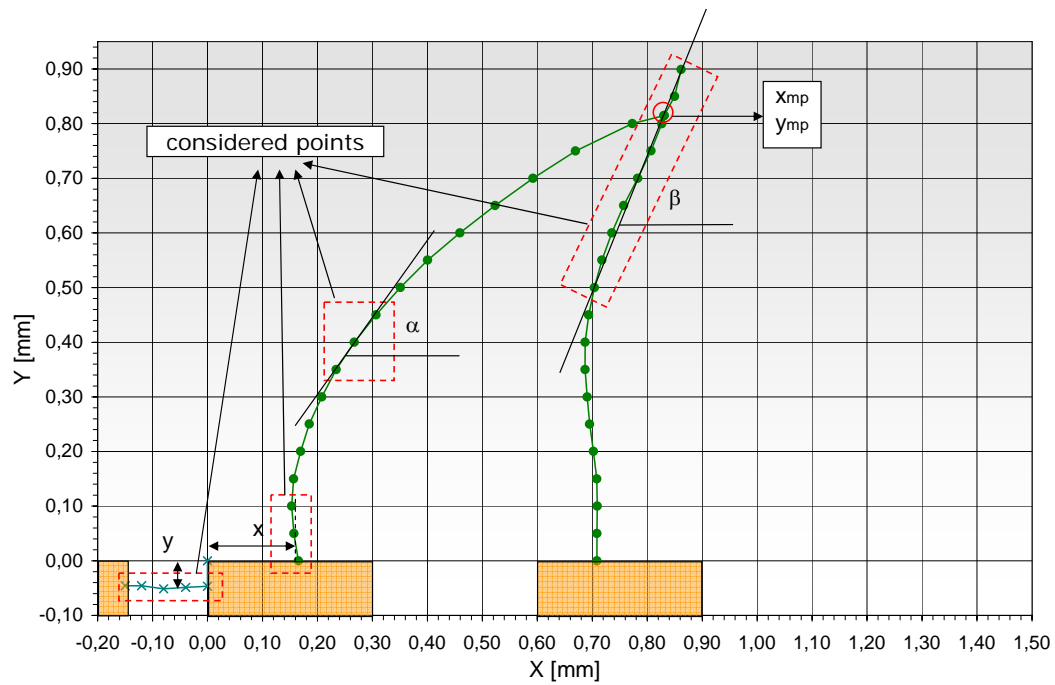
Outputs definition for the weld line number 3.
